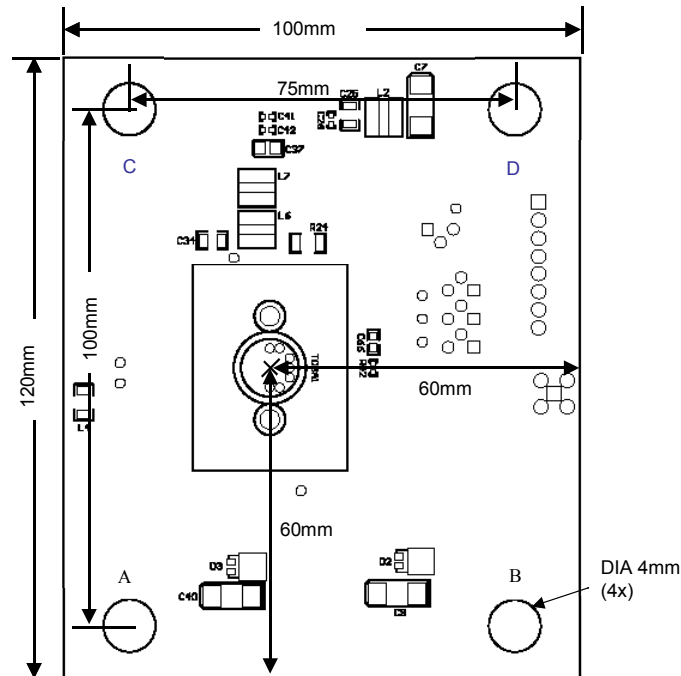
Bottom-side mechanical layout of evaluation board
